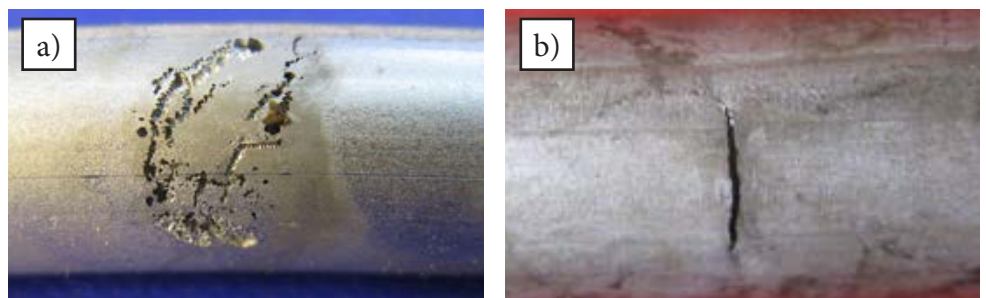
Exemplary corrosion of tubes made of stainless austenitic steel: a) pitting corrosion of steel AISI 316L, b) stress corrosion-induced crack in a tube made of steel AISI 321
